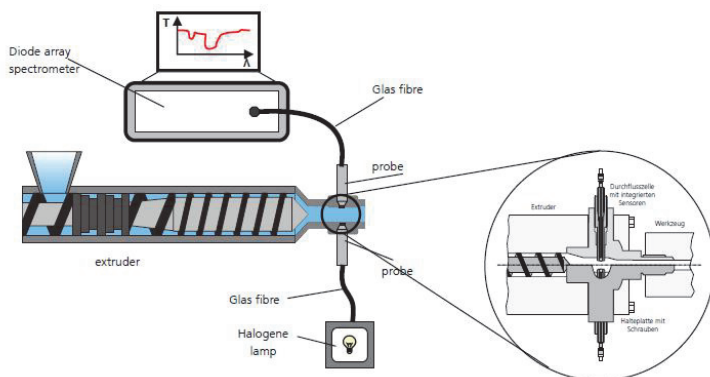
Drawing of the extruder equipped with probes for transmission measurement. The probes were installed in an adapter at the extruder die.
